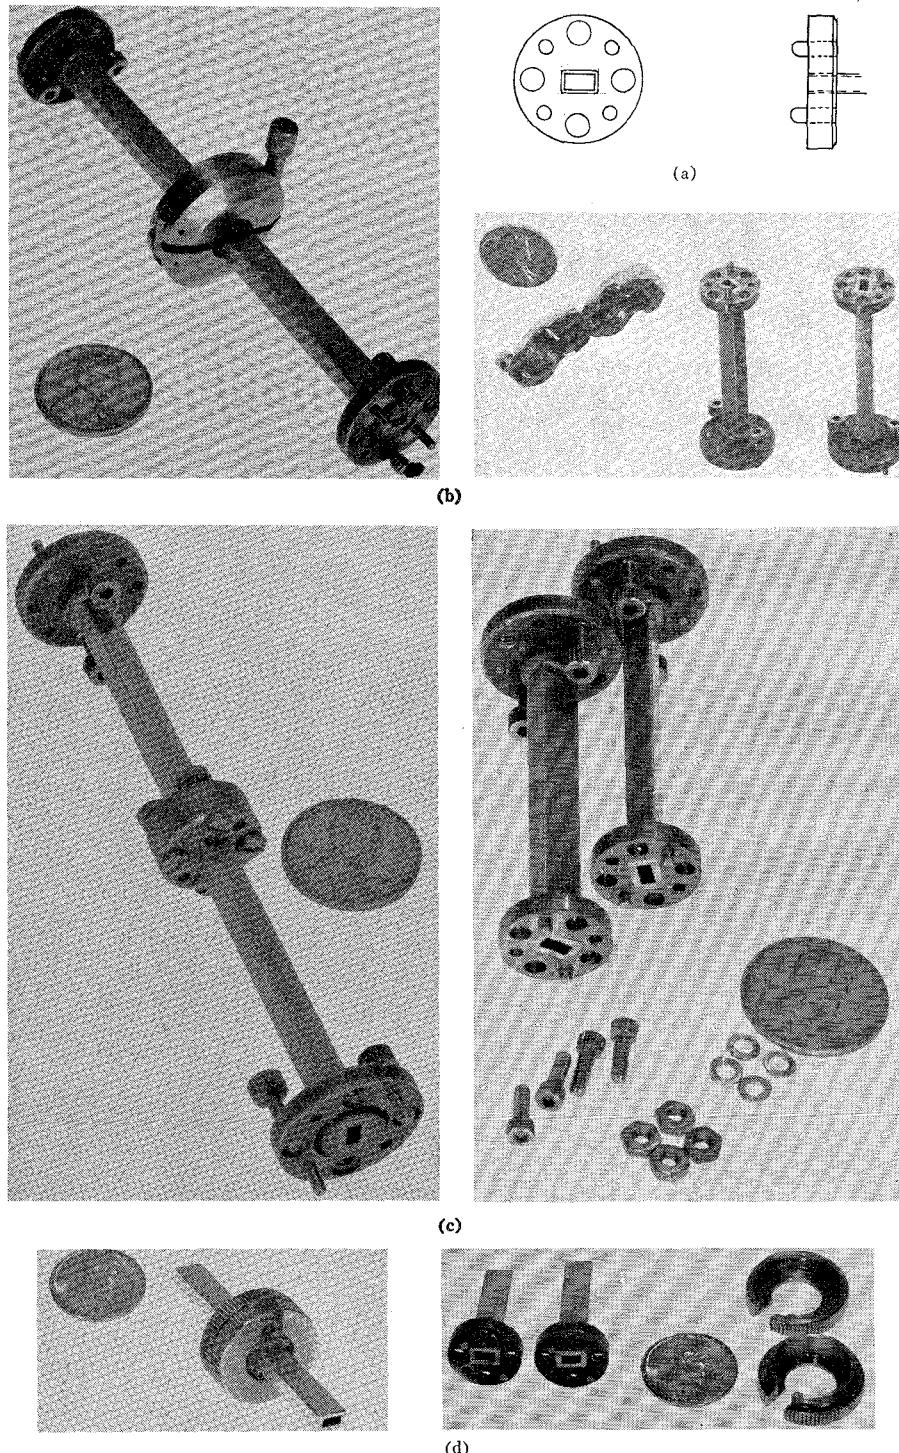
Basic design for millimeter waveguide flange proposed by E.I.A. Alignment pins are used with either screws and nuts or a quick clamp similar in principle to the Philips.
